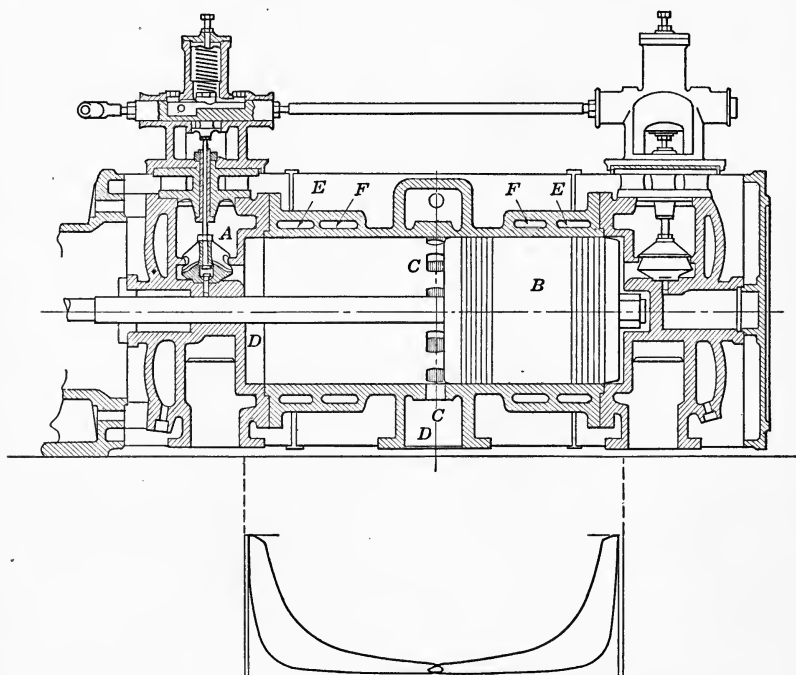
Cylinder of Stumpf engine with indicator card.
